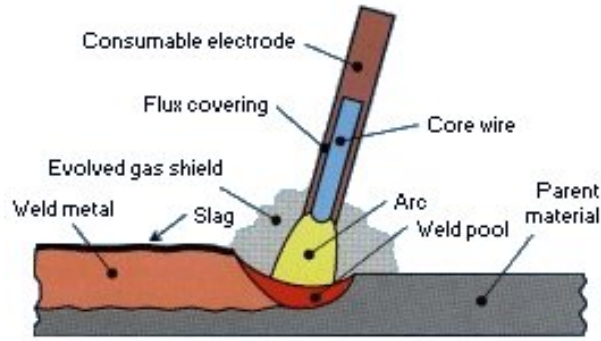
Schematic view of manual metal arc welding [48].
